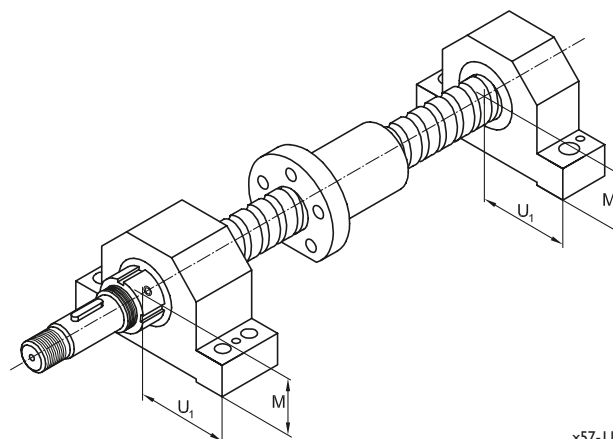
The same reference dimensions (U₁, M) for precision locating and floating bearing units simplify mounting
